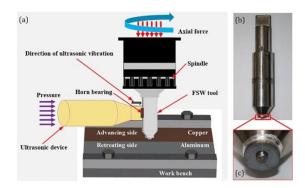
(a) Schematic Illustration of Friction Stir Welding Process (b, c) Tool Used.
